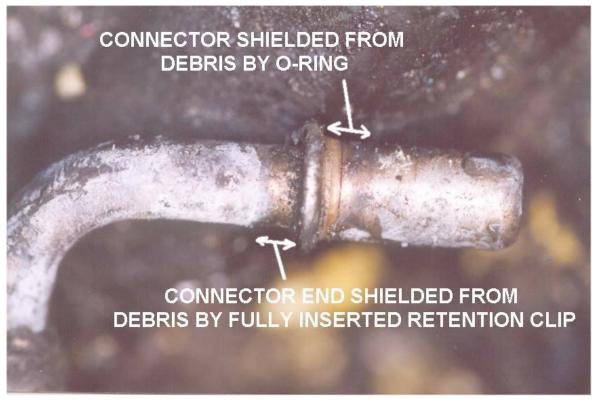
FUEL HOSE END DEBRIS PATTERNS
